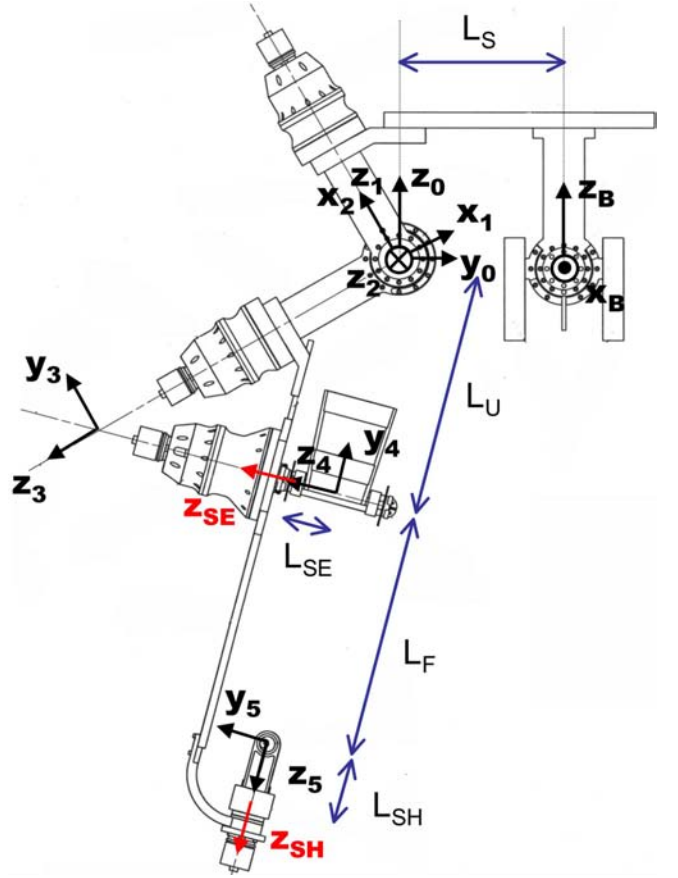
CAD drawing of MGA Exoskeleton shoulder showing link frame assignments.
